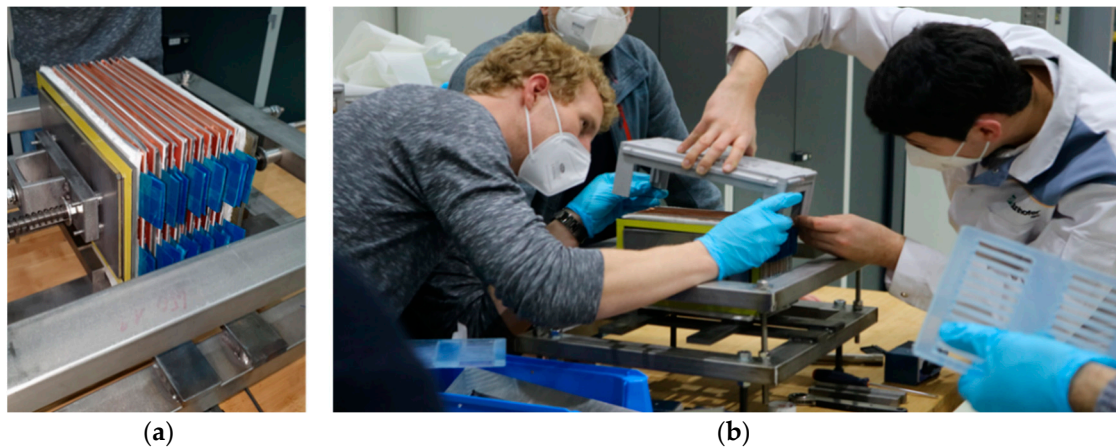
Demonstrator assembly: (a) positioning of the cell stack in the joining device; (b) assembly of the module shells.
